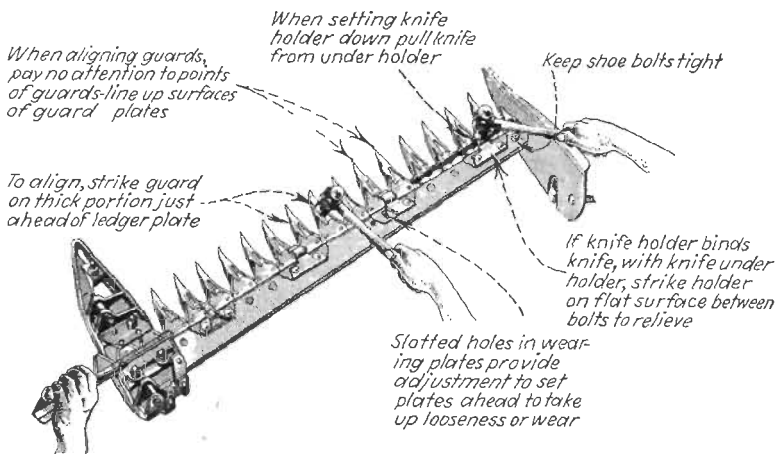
Complete mower cutter bar, with instructions for adjustment of parts.
